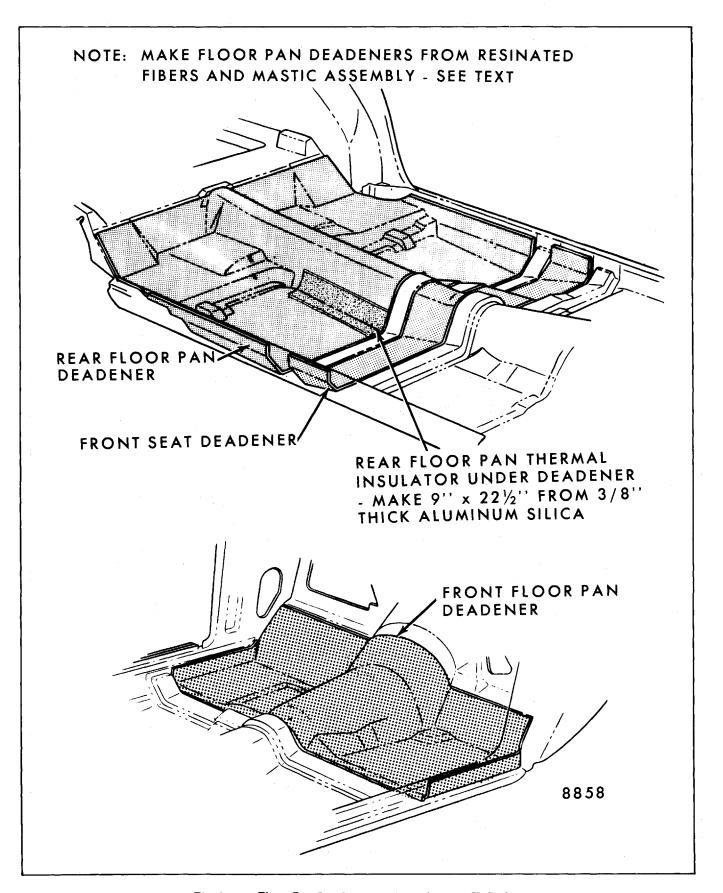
Floor Pan Deadeners and Insulators - K Styles
